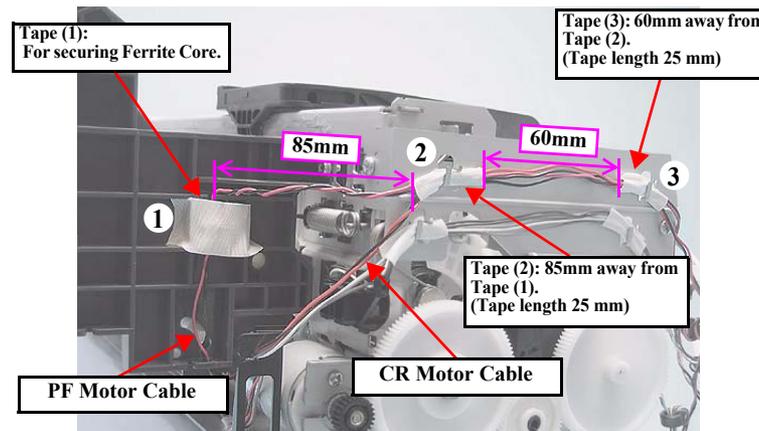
Routing/Securing the PF Motor/CR Motor Cables
